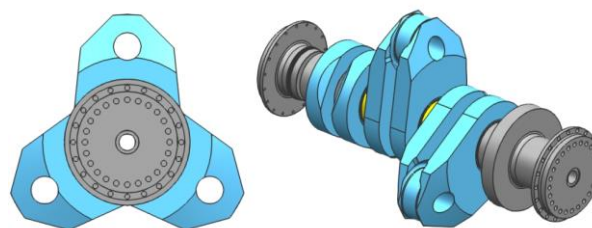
Crankshaft with  $120^\circ$  crank distribution
